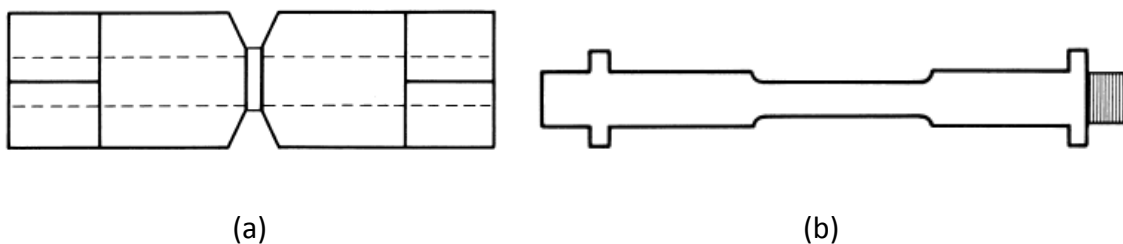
(a) Tubular specimen (b) Solid bar specimen [1]
